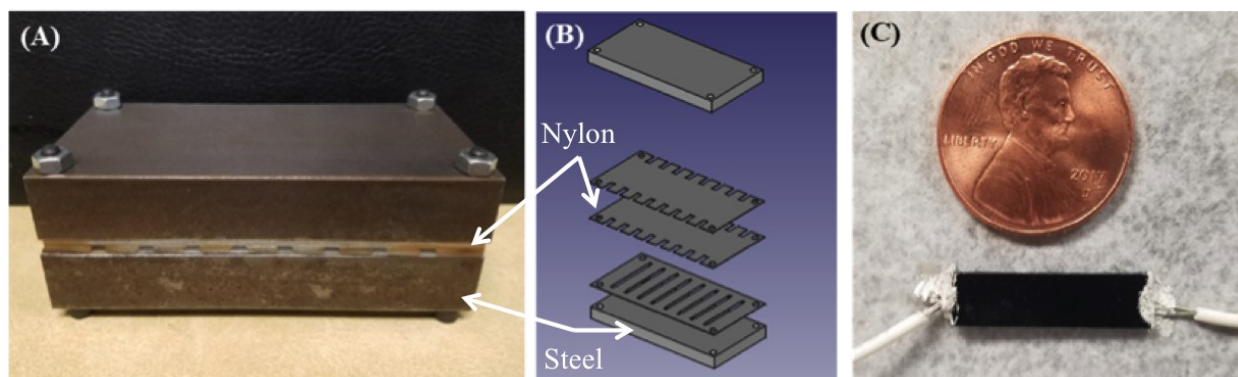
(A) Image of the fabricated injection mold in its assembled form; (B) Exploded view of the mold assembly; and (C) Sensor sample created via injection molding including electrodes adhered to end faces of cut sample with conductive silver paste.
